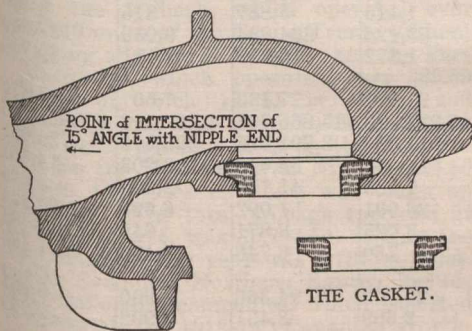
M.C.B. Standard Air Brake Hose Gasket.
